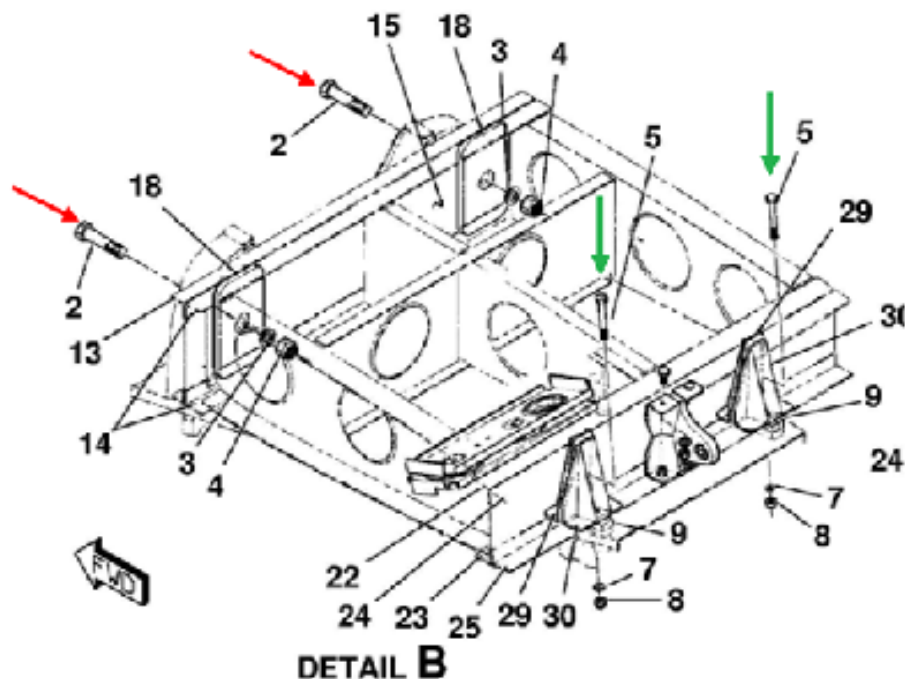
Horizontal Stabilizer Mount Bolts Installation, (Detail B),
